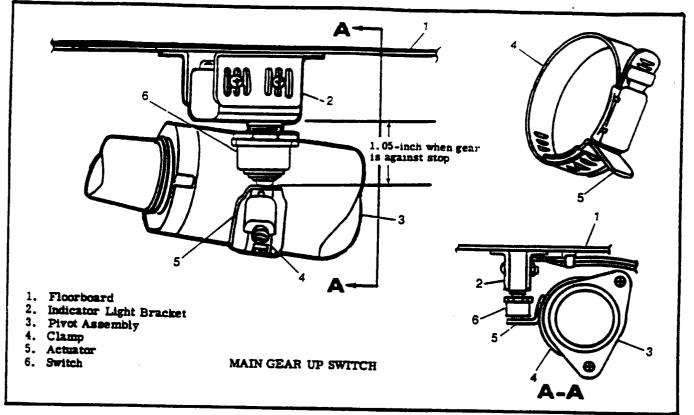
Rigging Main Landing Gear (Sheet 3 of 3)
